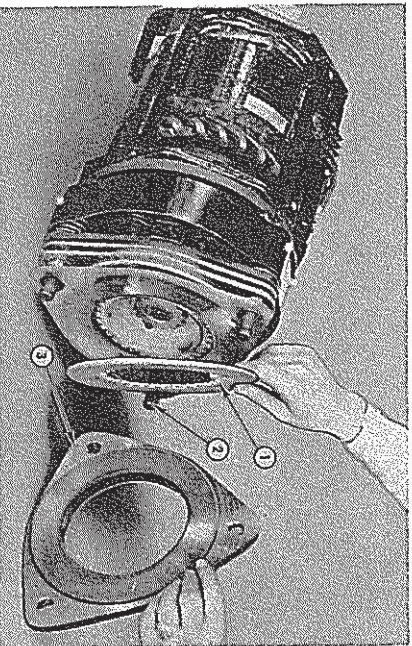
REMOVING BRAKE PLATE AND DISCS
